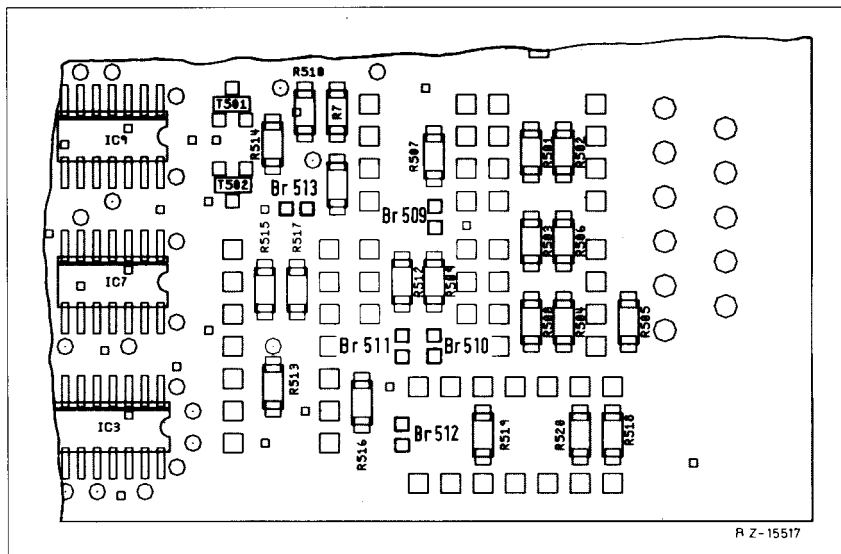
Solder links for the serial interface (motherboard, solder side)
